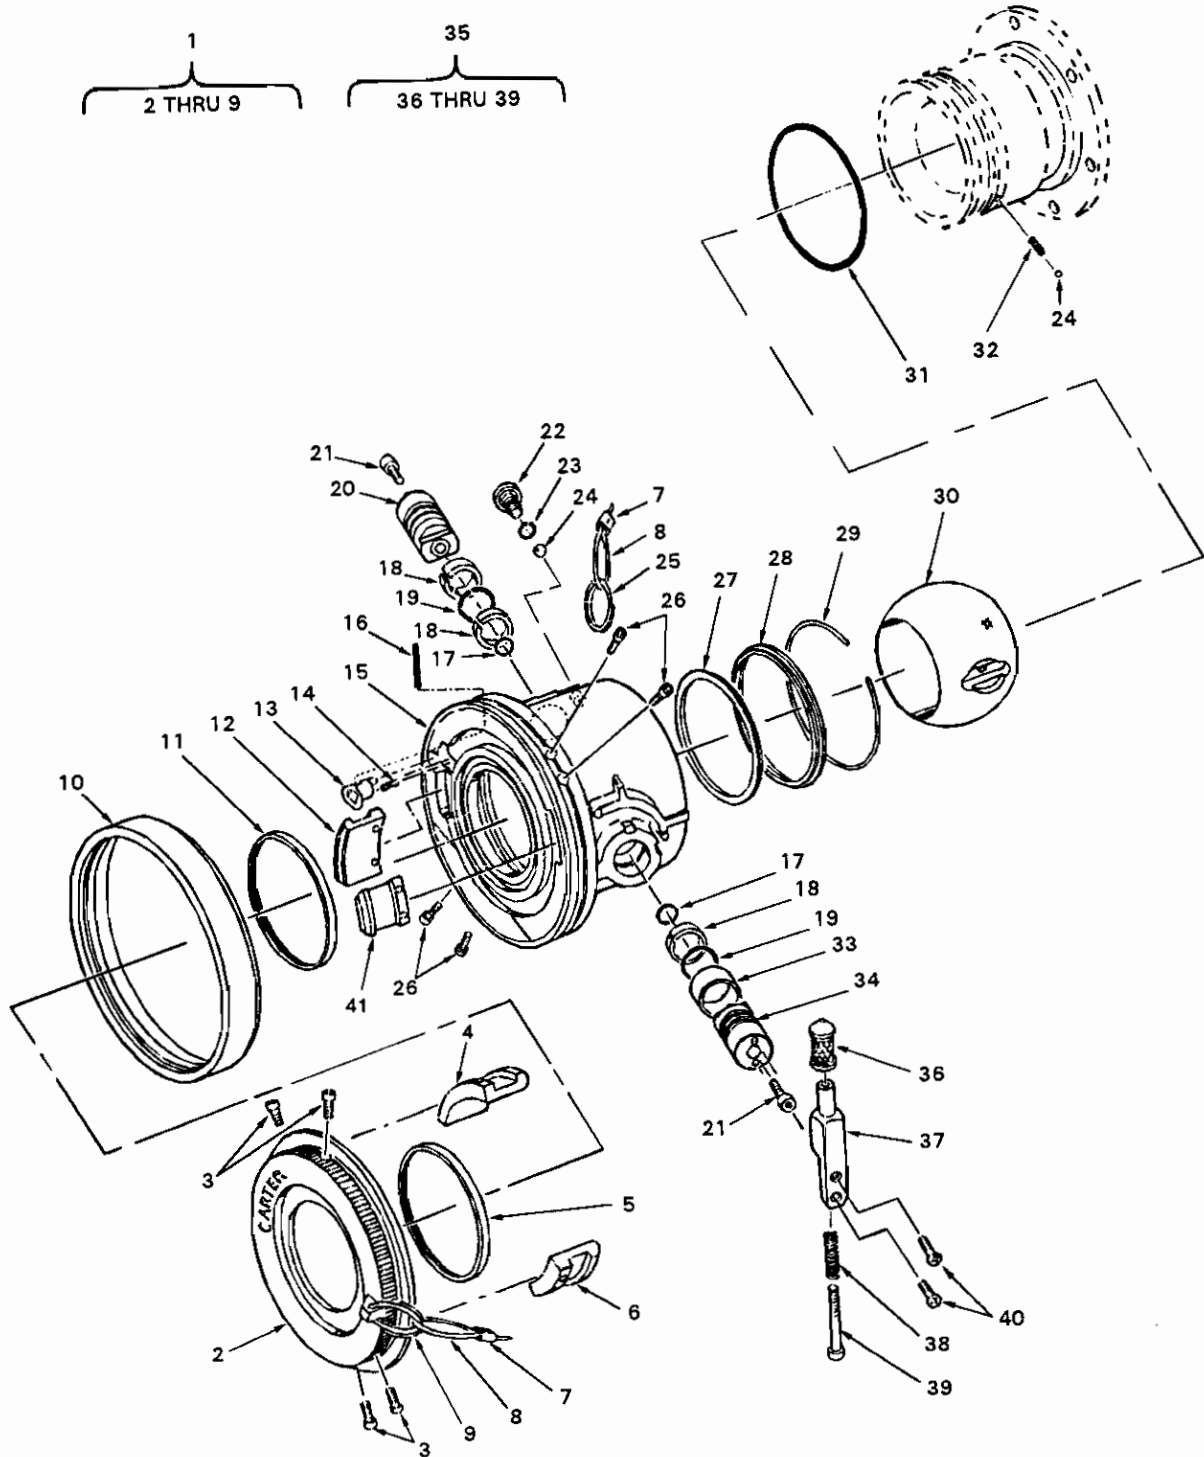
Coupling, Unisex, 3-Inch, Valved
